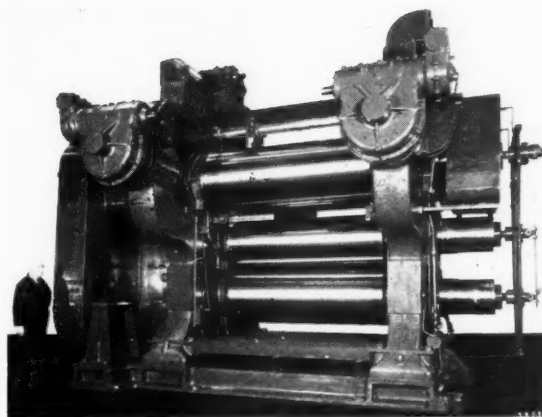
The largest ever built for plastics film and coatings, this four-roll L-type calender has 32-inch diameter by 92-inch face rolls, with individual motor adjustment on each screw.
